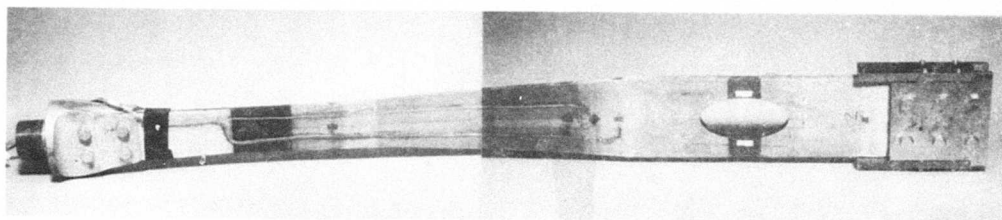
Static/Fatigue Specimen With End Fittings Installed.
